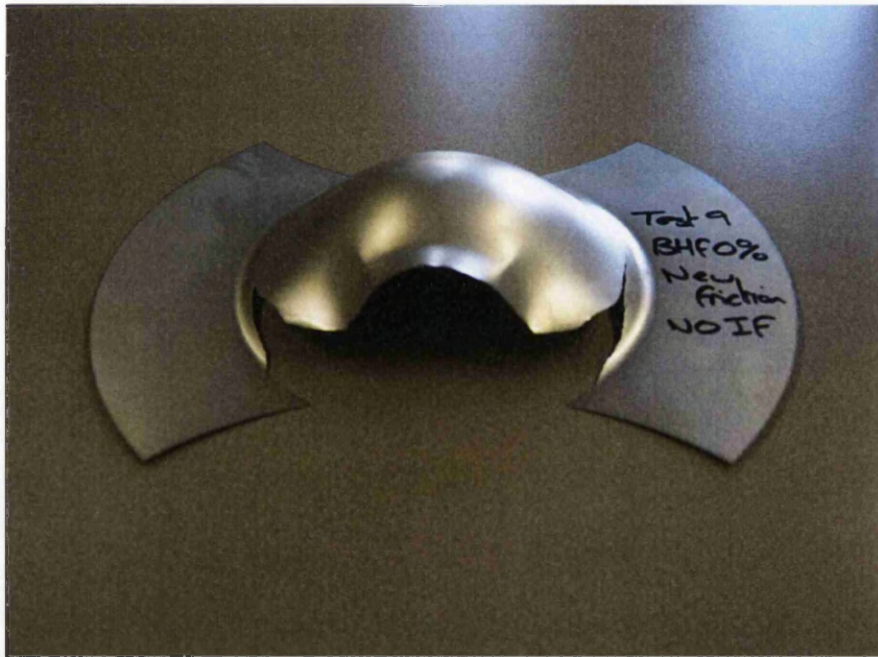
80 halterwidth blank that has failed due to edge cracking
